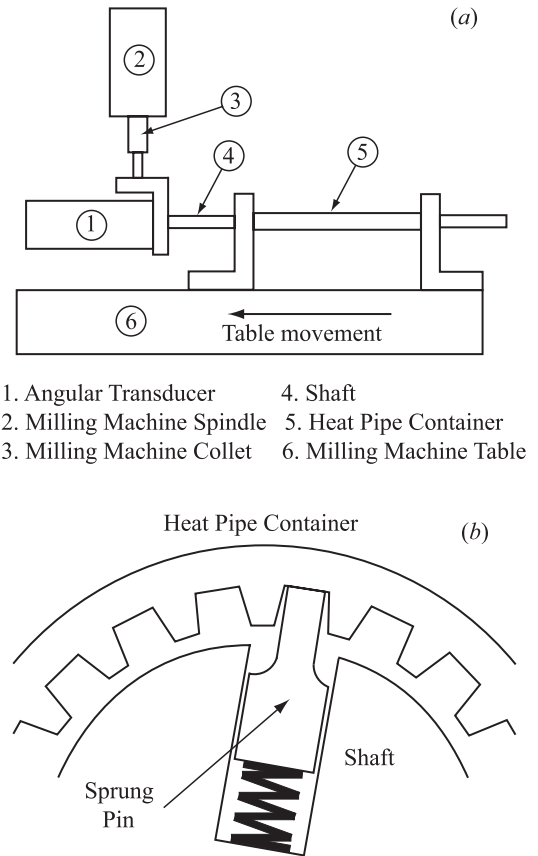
Schematic of the helical pitch measurement technique: (a) Major components; (b) Cross-sectional view of sprung pin engaging a helical groove.
